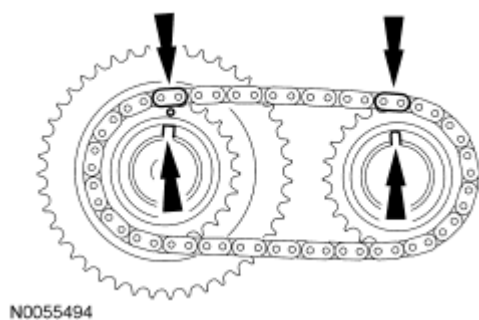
Aligning RH Exhaust Camshaft Sprocket & RH Secondary Timing Chain Colored Links With Timing Marks
